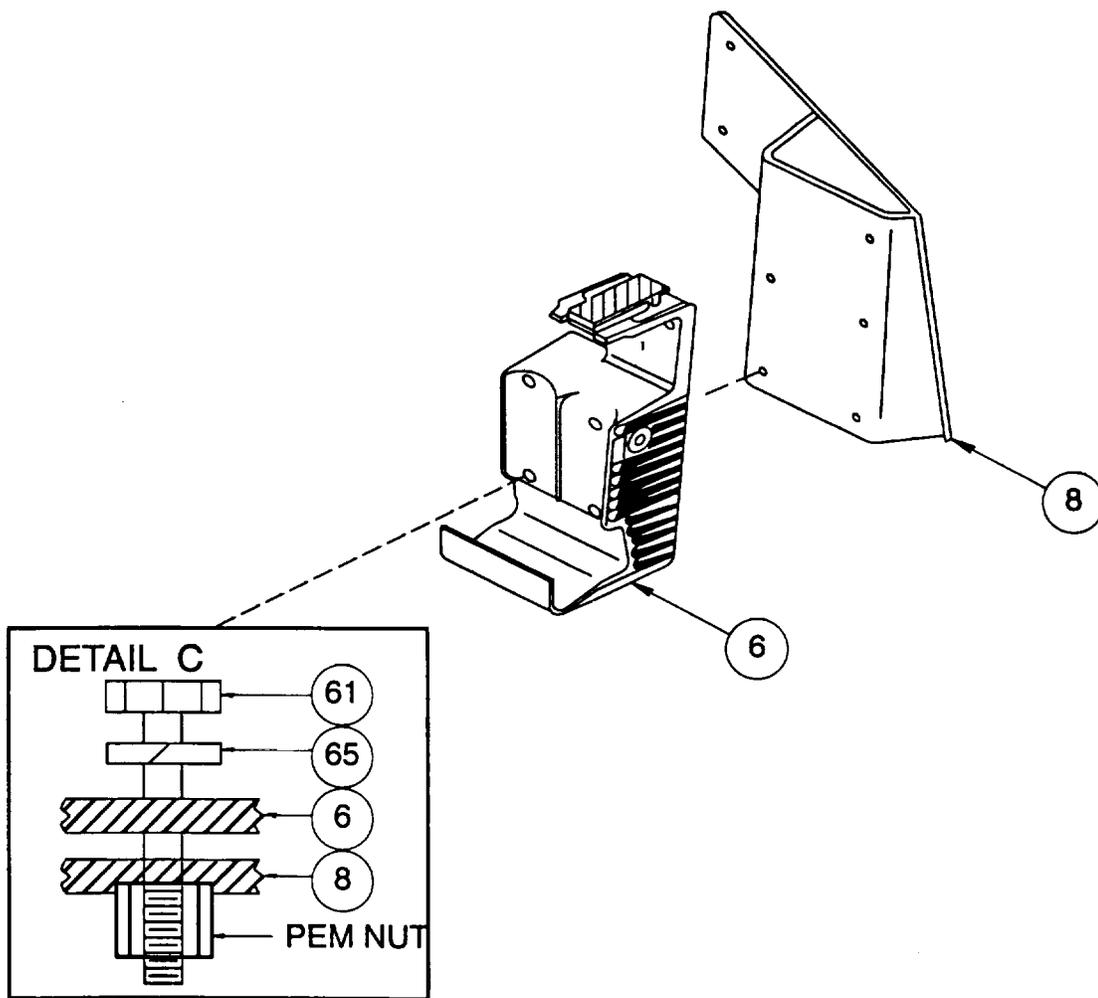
AN/PSN-11 Mount Base and Mount Assembly
